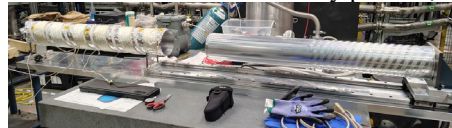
Assembly fixture and setup to insert inner tube into outer tube
